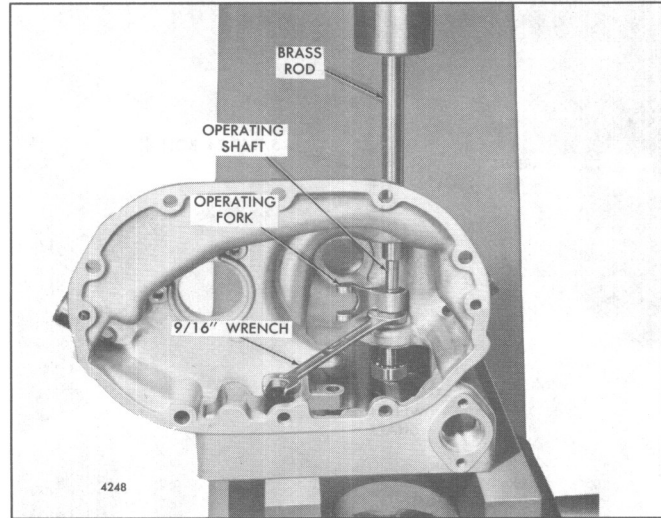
Removing Operating Fork Shaft and Lever Assembly from Governor Housing
